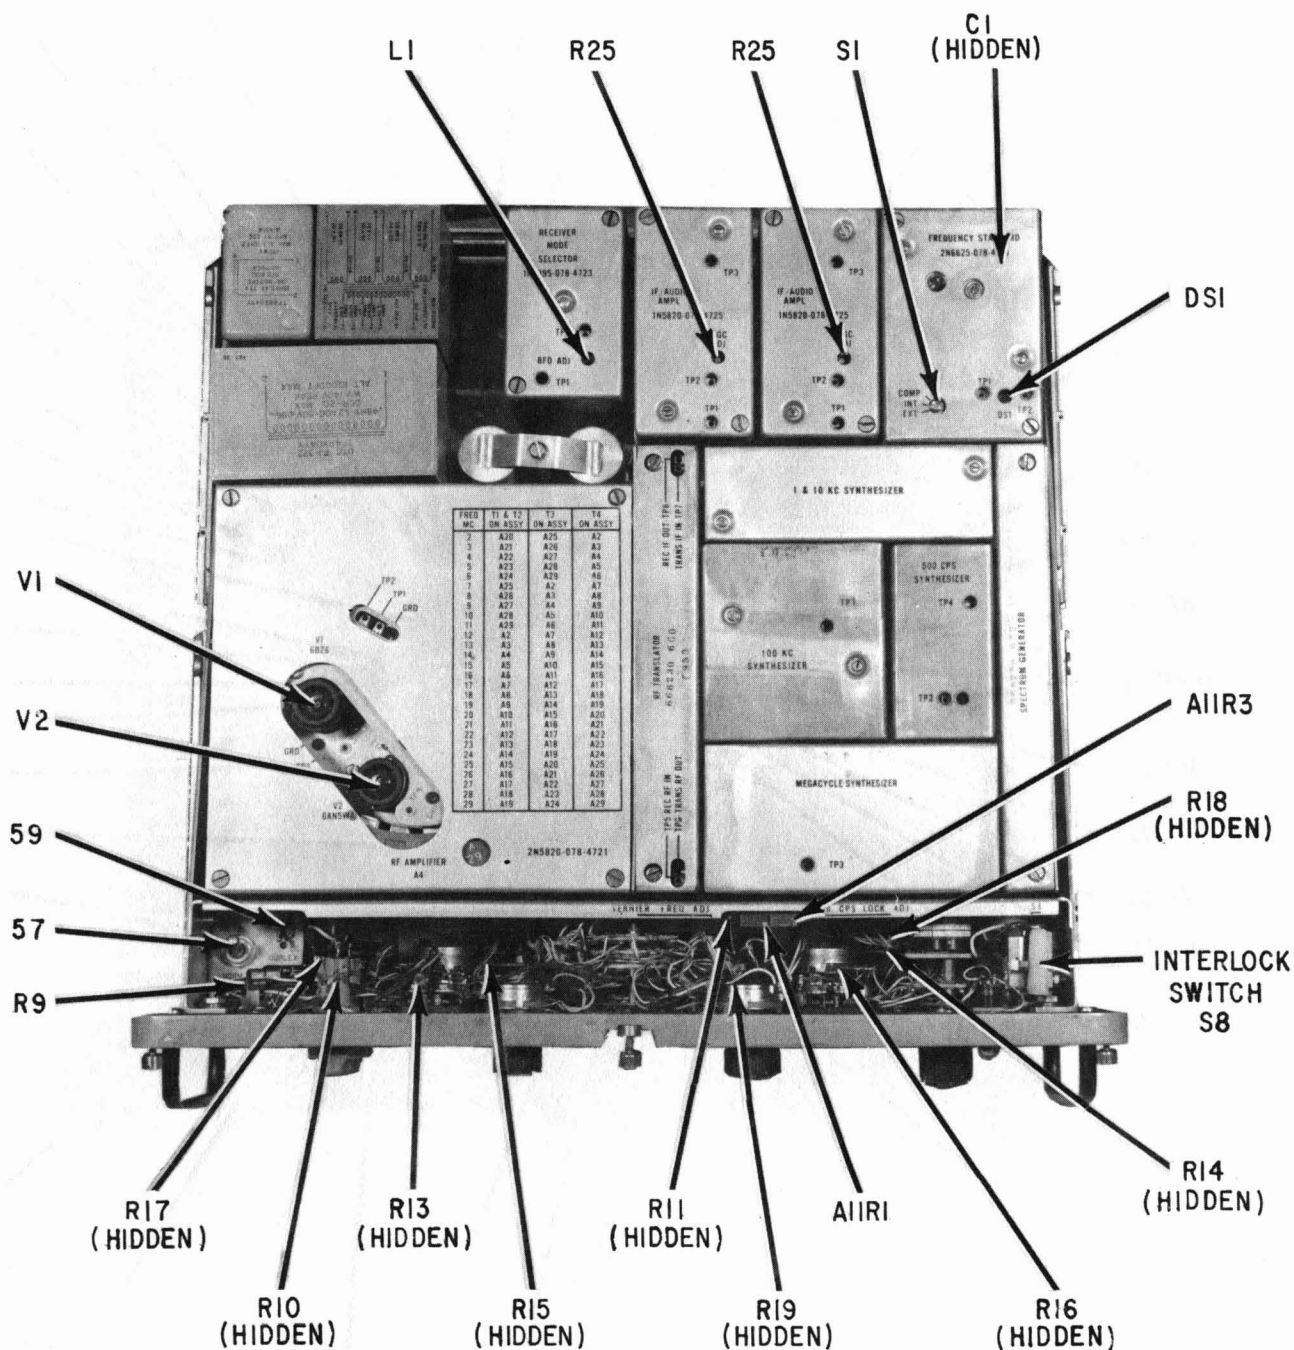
Radio Receiver R-1051/URR, Top View, Case Removed, Component and Test Location
